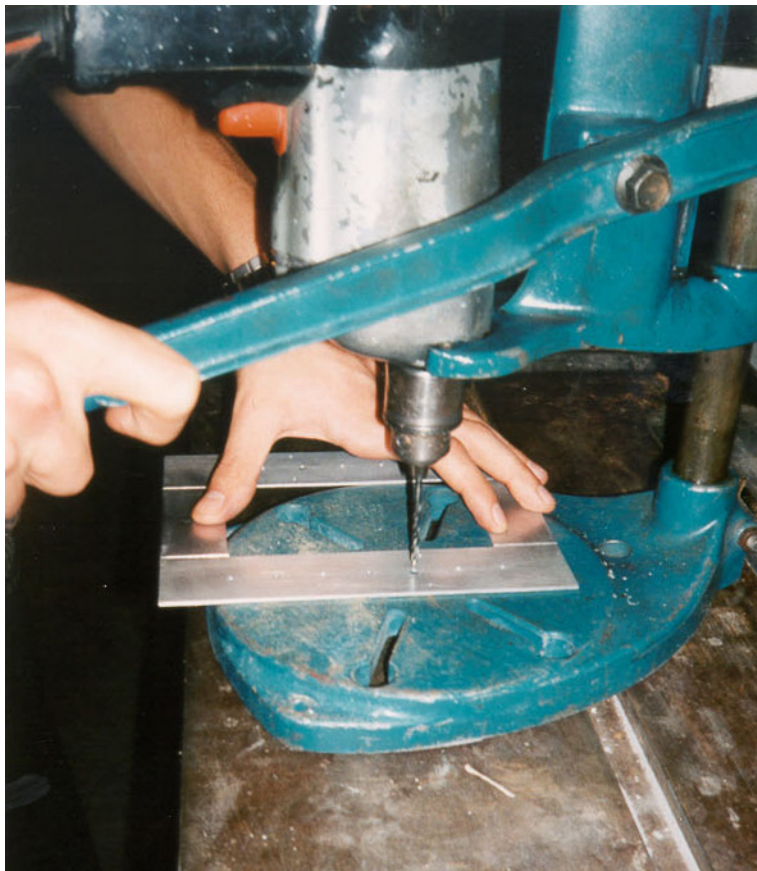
Drilling holes into the aluminium body using the vertical drill
